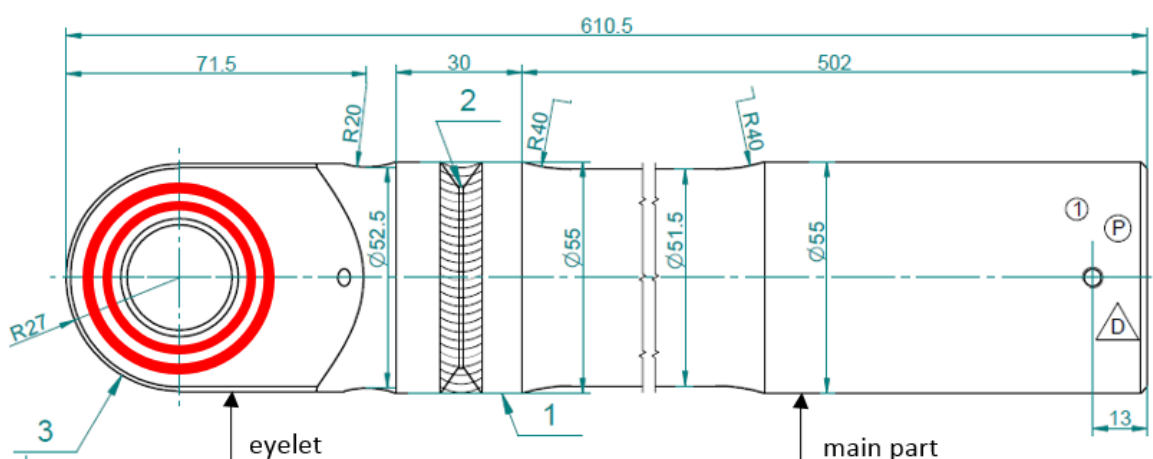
Shape and dimensions of the drag strut used for testing. Red areas indicate melted paths.
